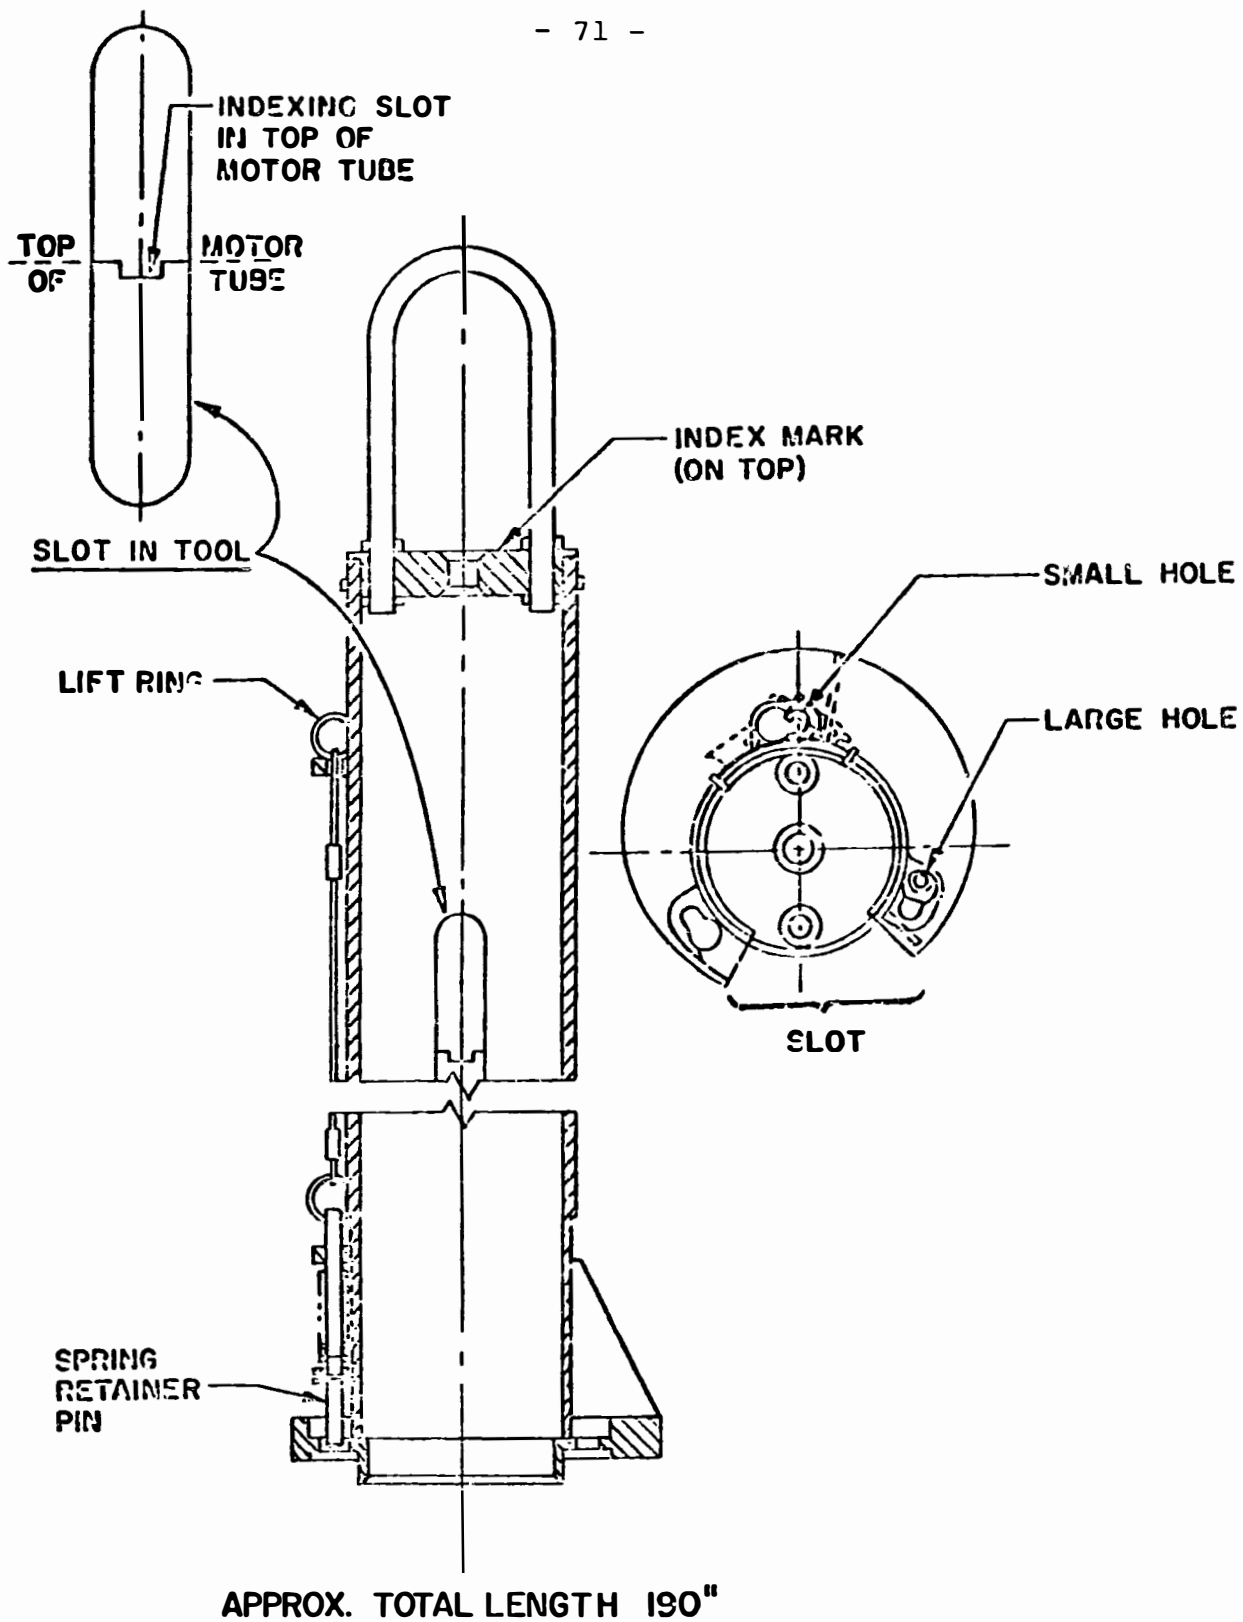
STATOR INSTALLATION/REMOVAL TOOL, 706544-1052
